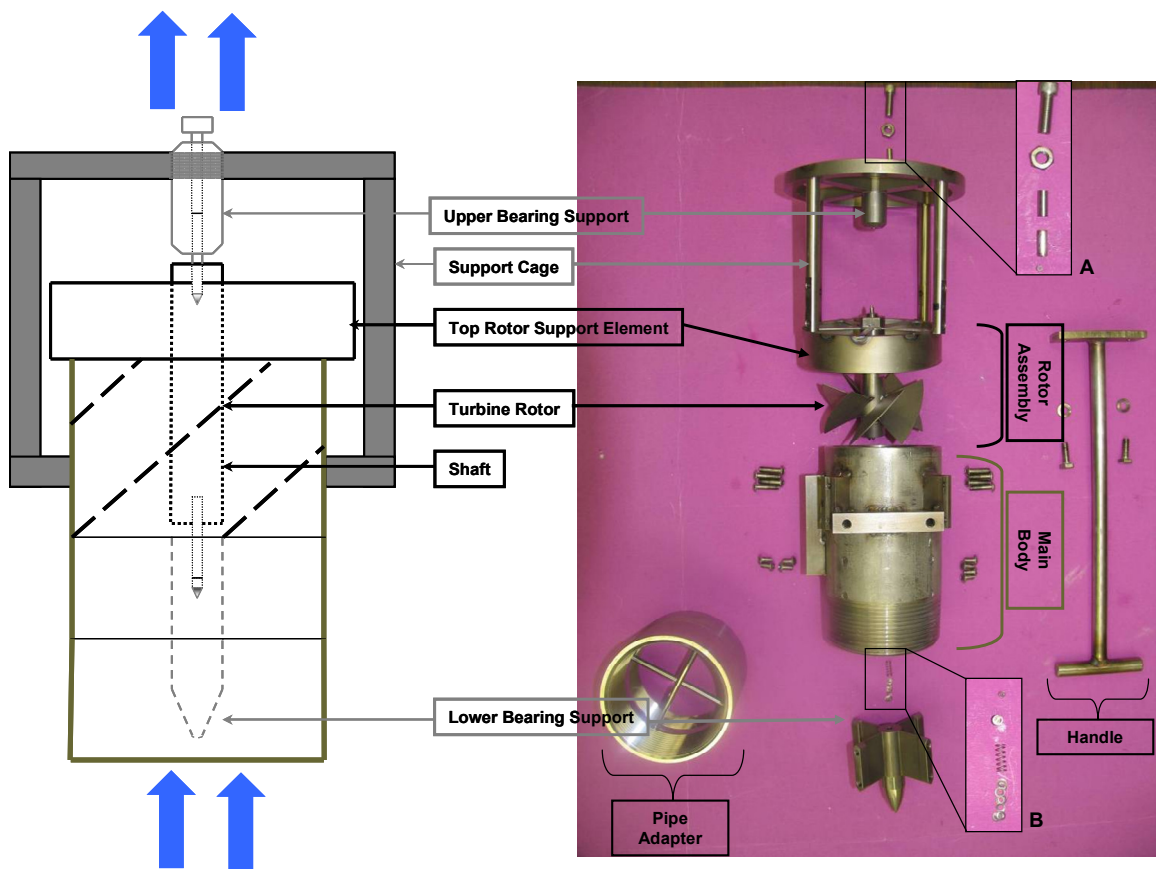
A.3 Disassembled device TFM1. TFM1 components include upper and lower bearing supports, turbine rotor assembly, sapphire bearings (on insets A and B), flow pipe (main body), pipe adapter, and springs.
